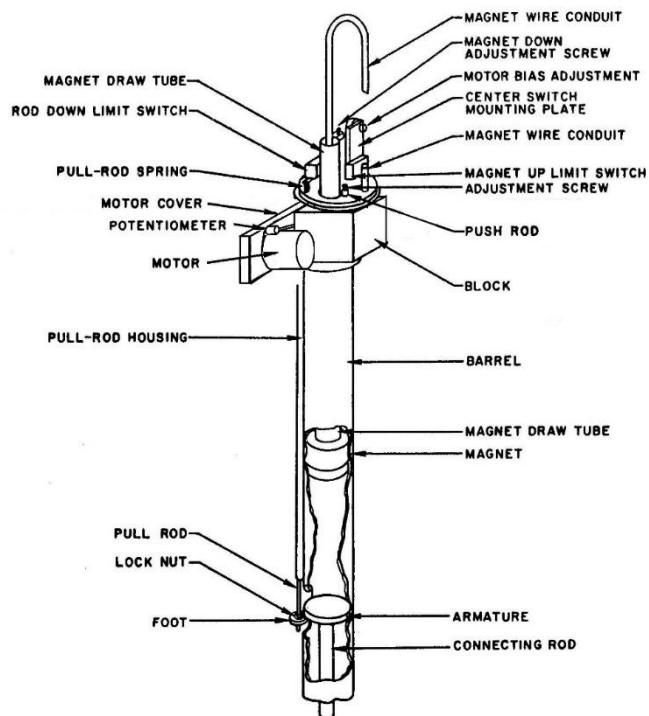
, Standard/Stepper Motor Control Rod Drive
